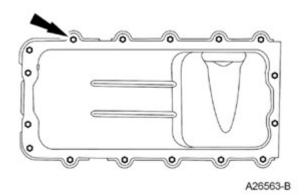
Locating Oil Pan Bolts Courtesy of FORD MOTOR CO.
